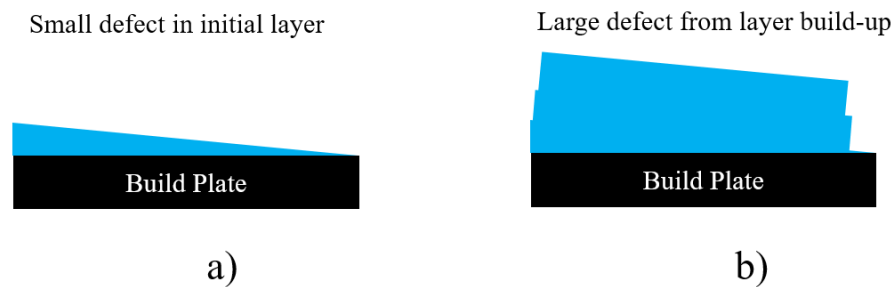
a) Small Initial Defect, b) Larger Built Up Defect
